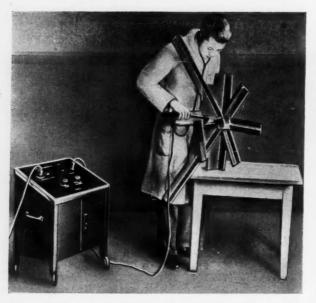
Using magnetic testing outfit to inspect welds in steel construction.
